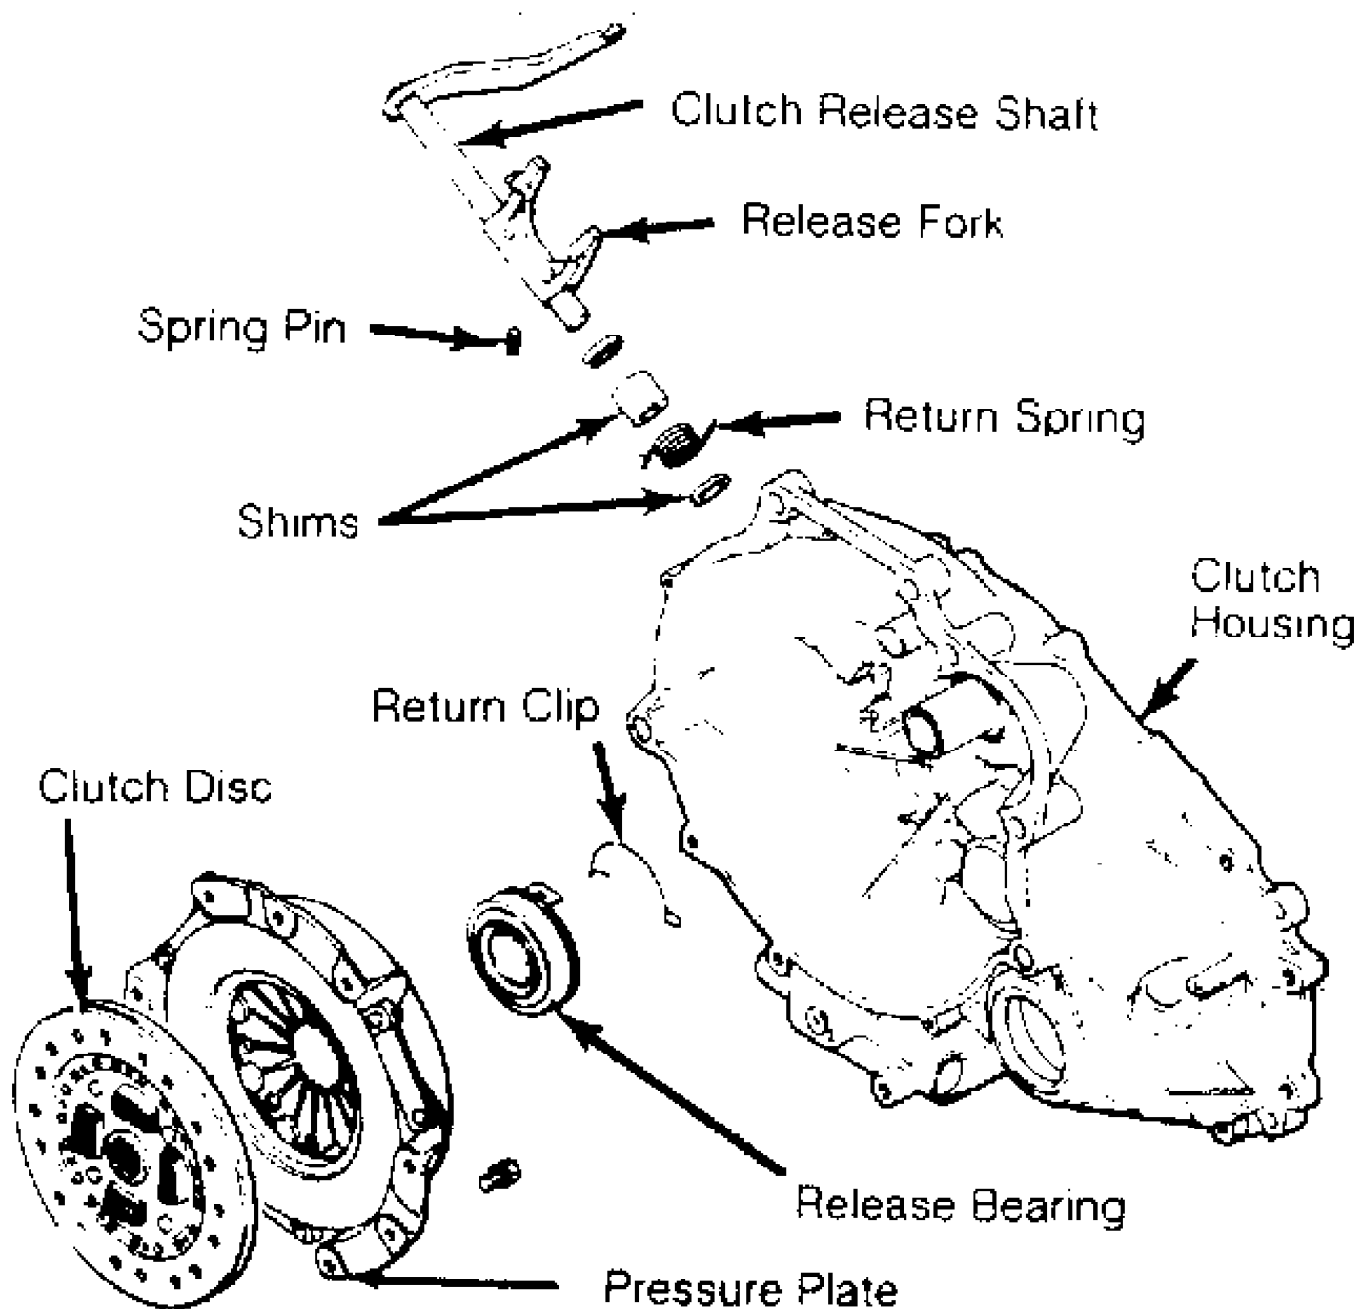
Exploded View Of Clutch Assembly (Typical)
